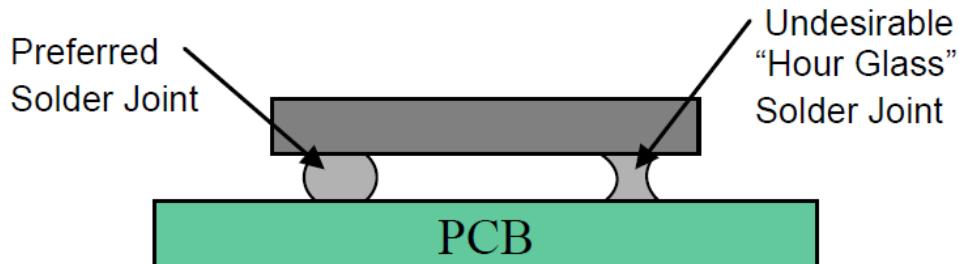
Side View of WDFN 8 Attachment Illustrating Preferred and Undesirable Solder Joint Shapes
